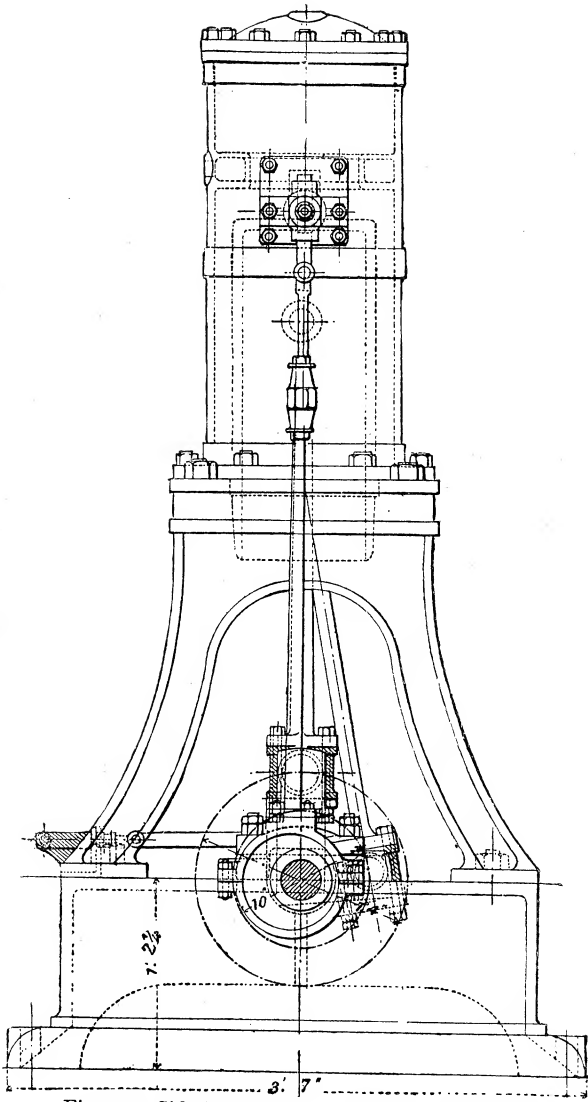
Side View of the "Eclipse" Gas-Engine.
